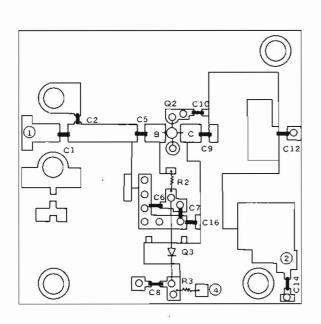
Z6-Z3 IF AMP Parts Layout
